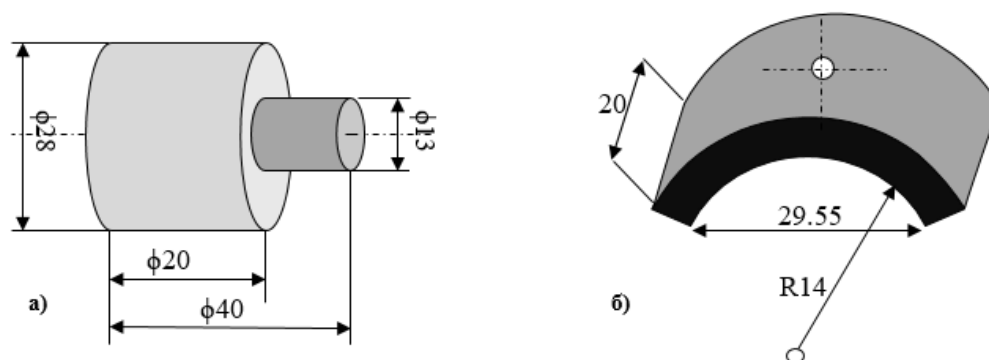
Shape and dimensions of: a) test sample; b) counter body
